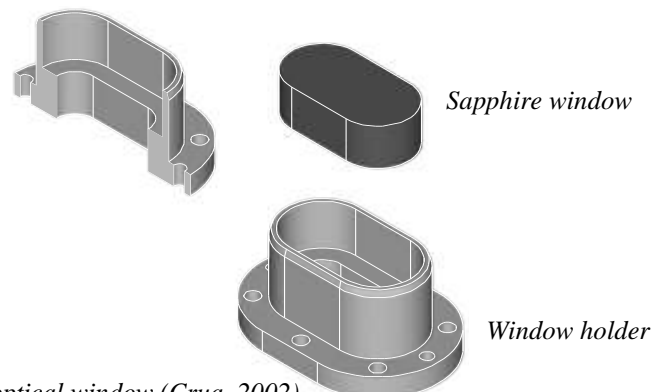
CAD drawings of the optical window (Crua, 2002)
